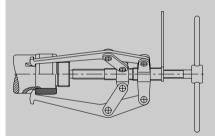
Dismounting of Inner Ring of Cylindrical Roller Bearing by using a Extraction Tool
